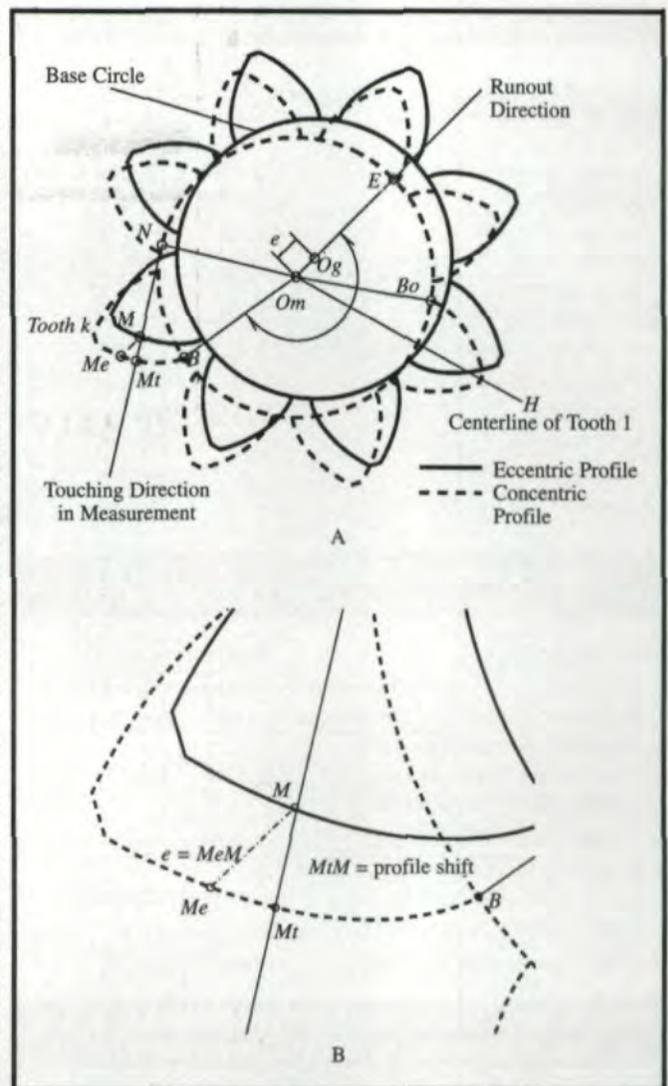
Profile Measurement on Eccentric Gear (left flank).
